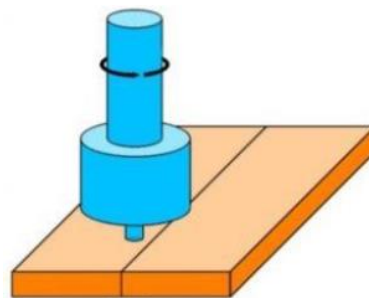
Stage 1 of the Friction Stir Welding Process - Tool Rotation
